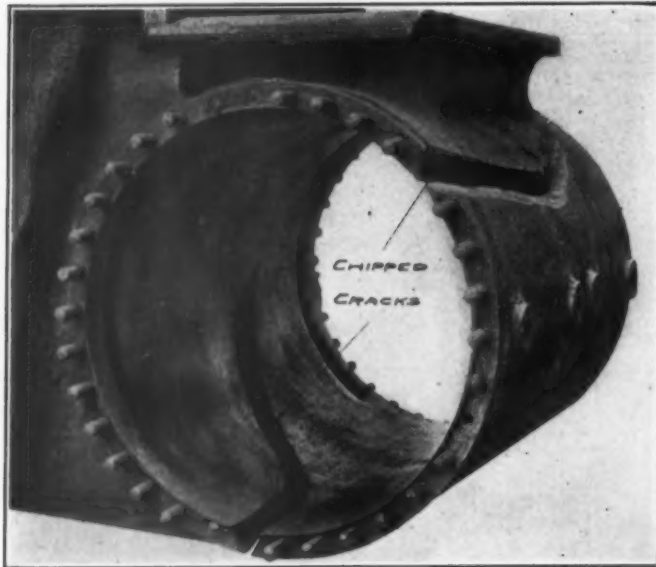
Cracks in a Locomotive Cylinder Prepared for Welding
